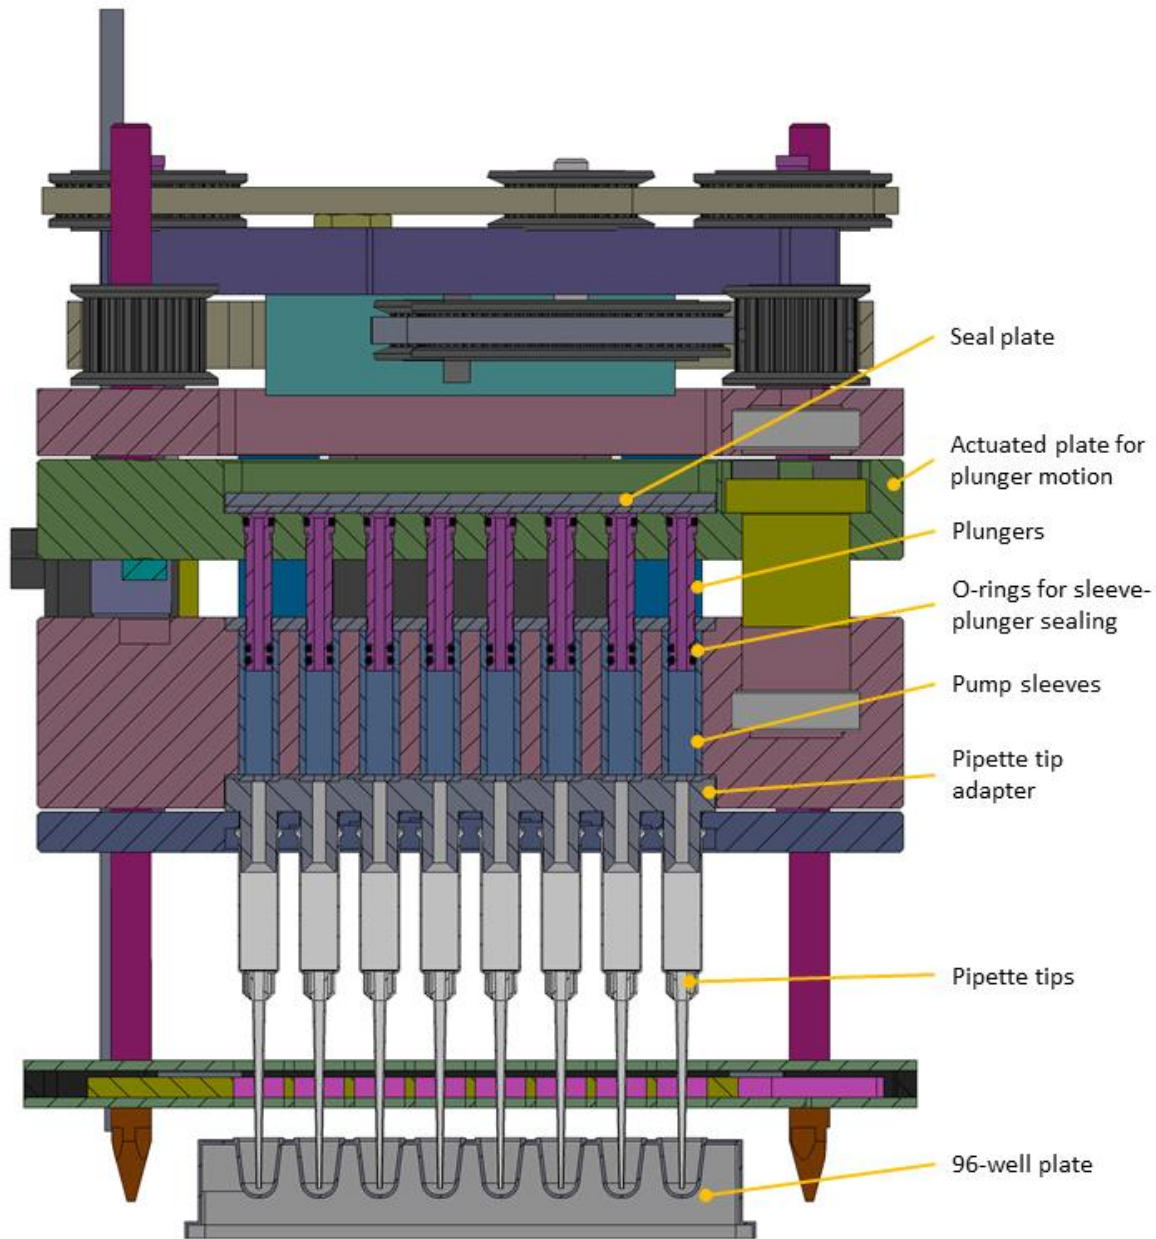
A section view of the fluid handling head showing an arrangement without washing-through capabilities.
